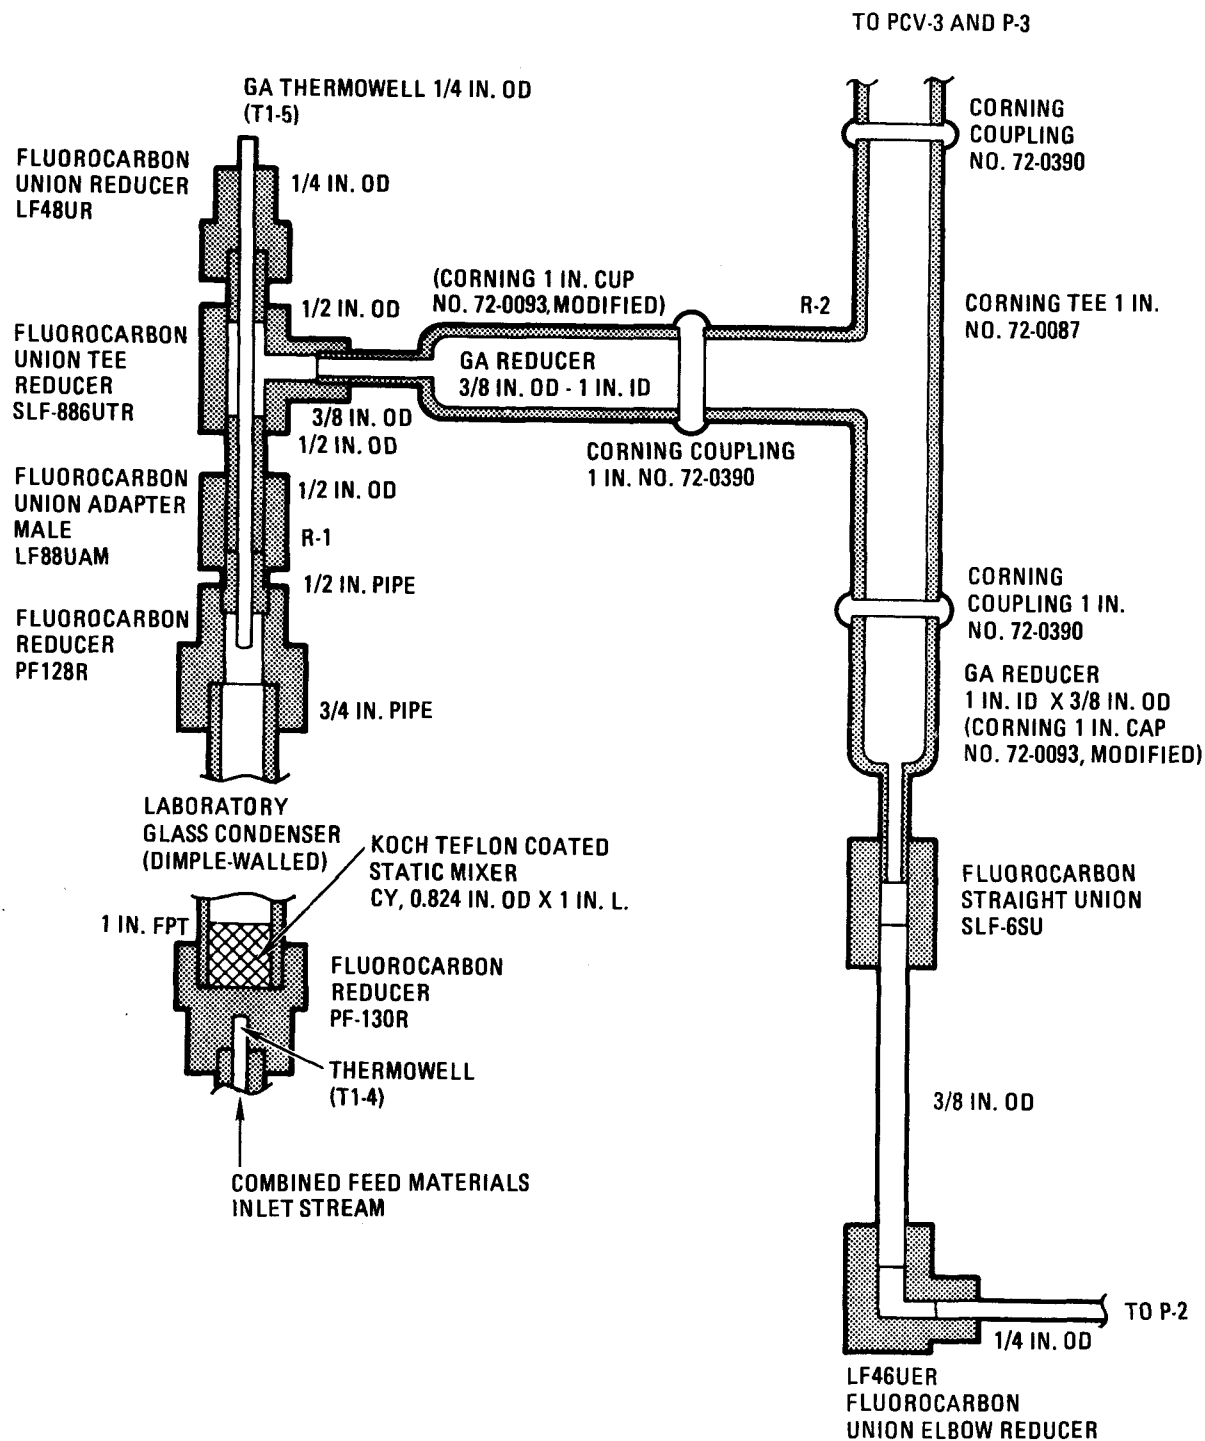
Main reactor R-1 assembly and gas-liquid phase separator R-2 lower assembly
